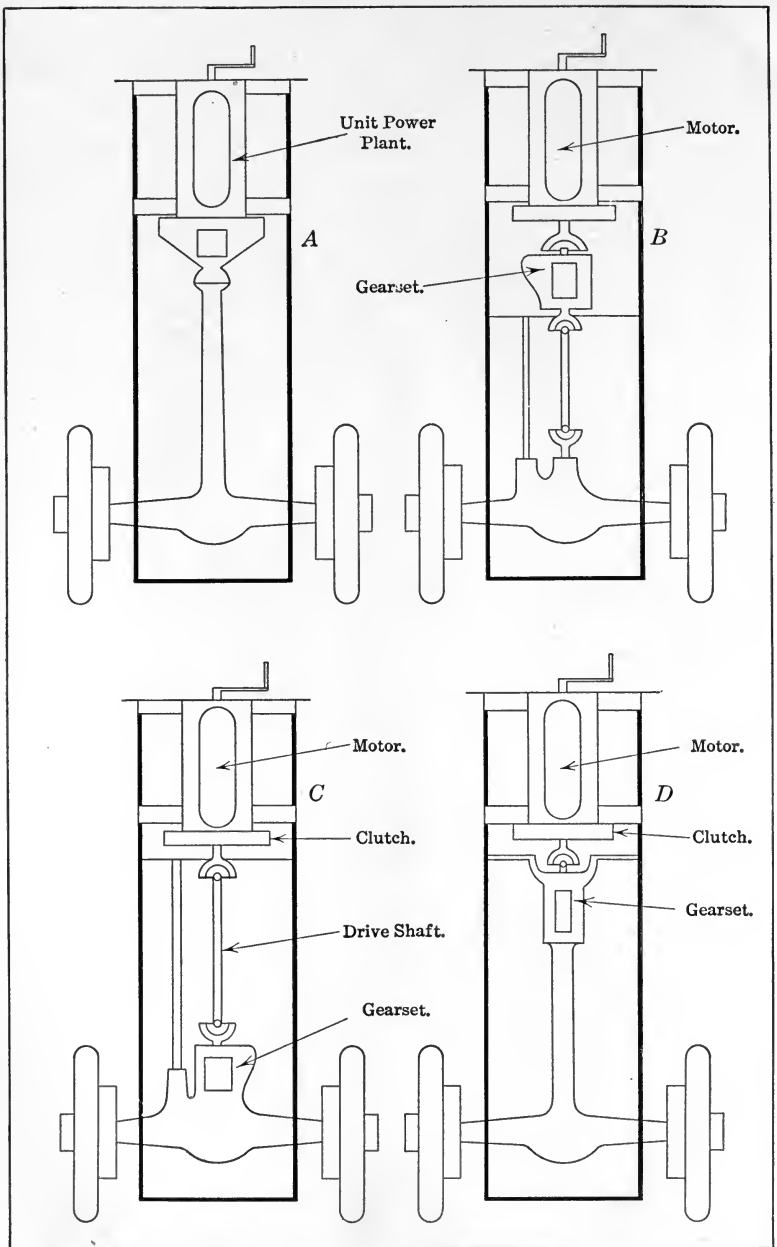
Conventional Methods of Installing Gearsets in Chassis. A—Combined with Engine to Form Unit Power Plant. B—Fitted as an Individual Unit Back of Engine. C—Combined with Rear Axle, D—Mounted at Front End of Driving Shaft Housing.
